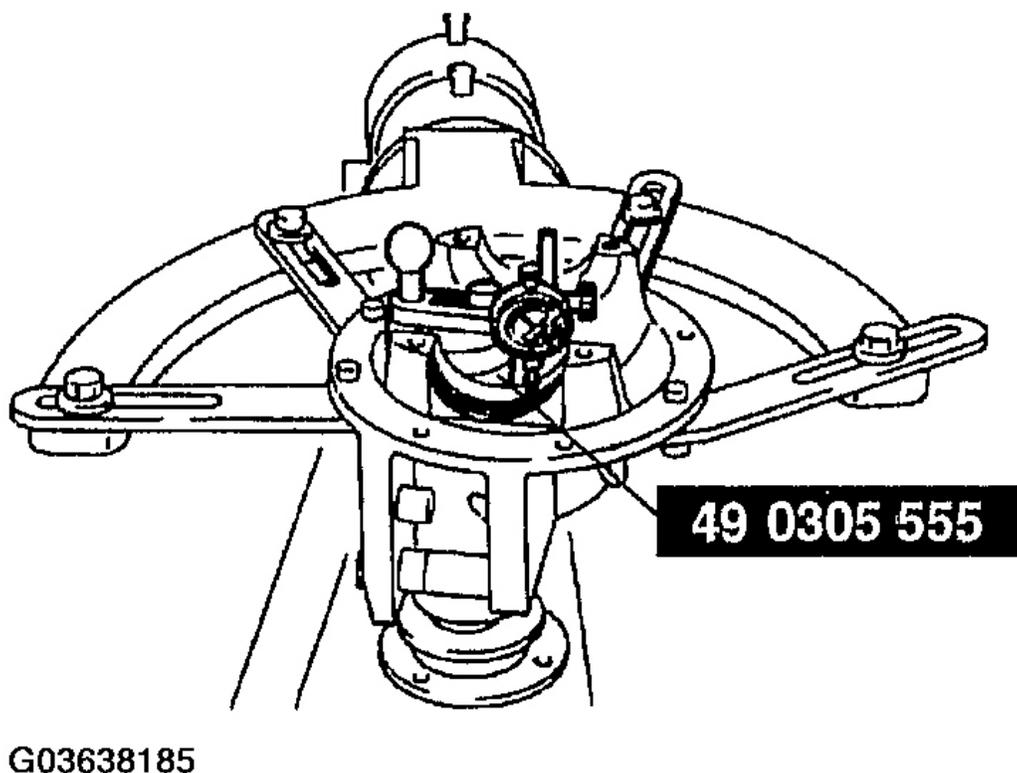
Placing SST Atop Drive Pinion Model Set Gauge Body Atop Gauge Block
